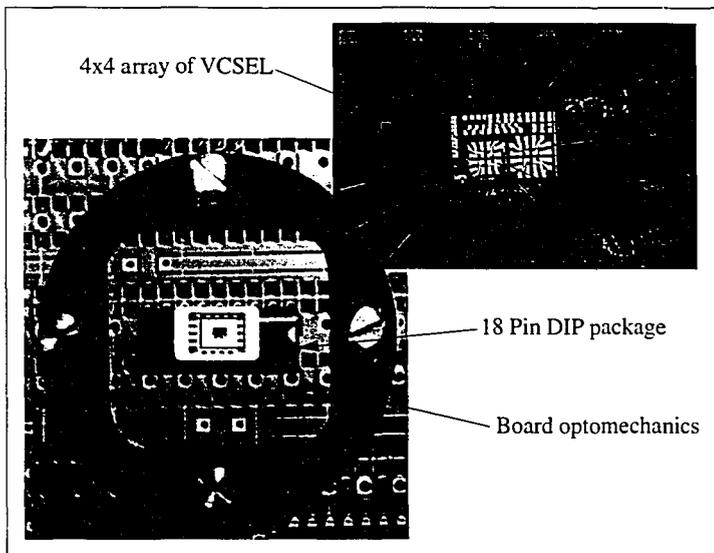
VCSEL packaged in a DIP carrier used for the speed-wired transmitter board.
